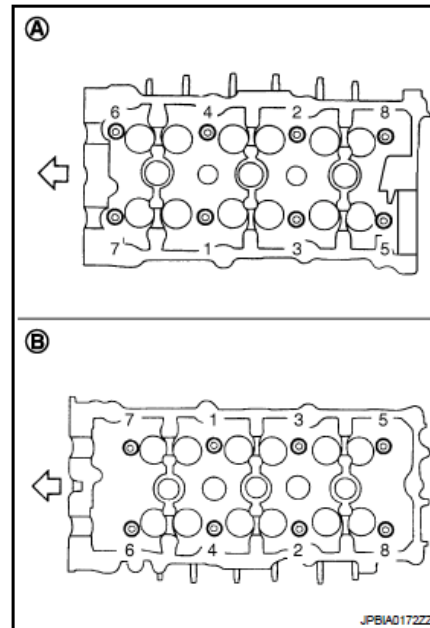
Identifying Cylinder Head Bolts Tightening Sequence
